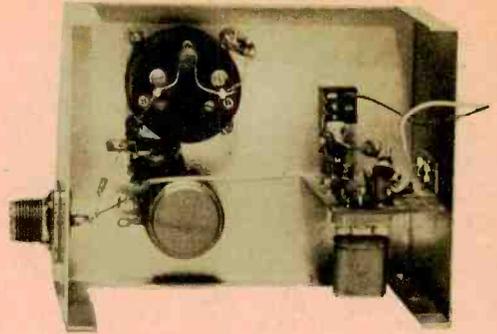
Before installing the circuit board on the right side of the cabinet, mount all components shown on the left side of the photo. Duplicate our layout and you shouldn't run into any problems.
